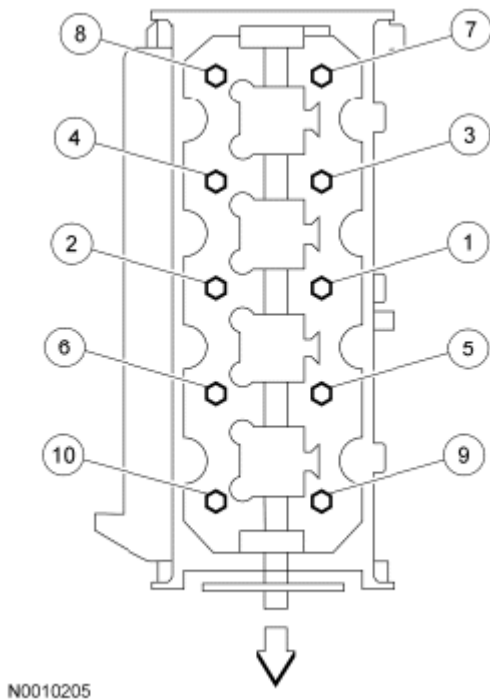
Identifying Cylinder Head Bolt Tightening Sequence
